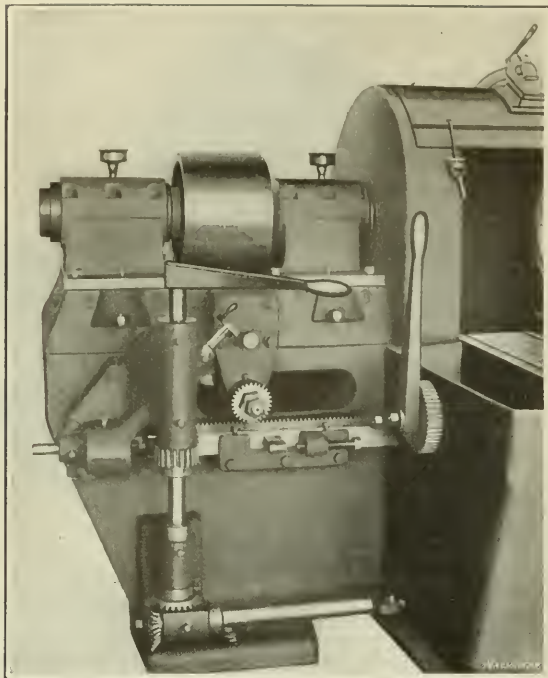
Close View of Feed Mechanism, Micrometer Stop-screw and Adjustable Back-stop
